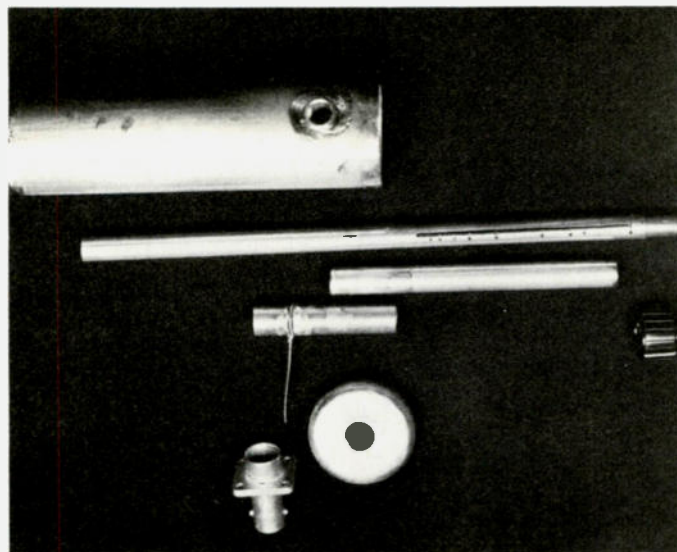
Photo D. Component parts of the harmonic generator prior to assembly. Only one BNC connector and one end cap are shown. The center conductor has been scribed for calibration.
